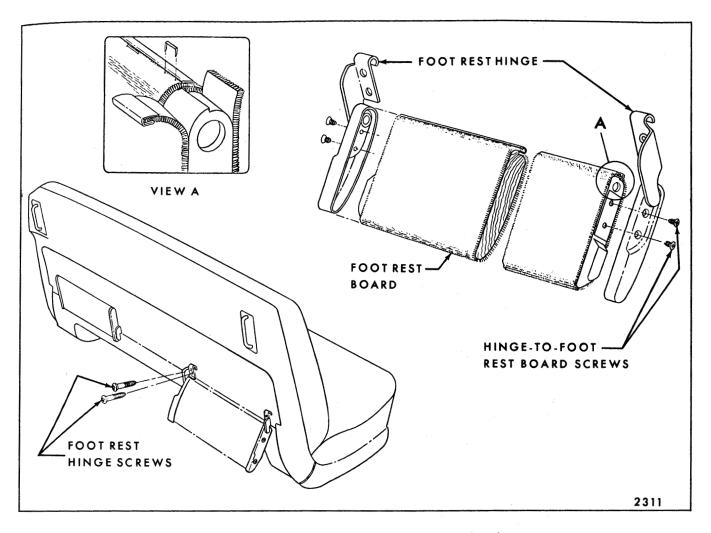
Foot Rest Installation - Cadillac 68169 Styles
